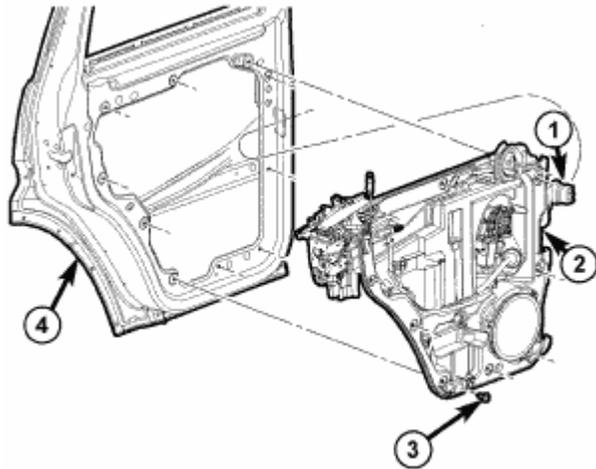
Removing/Installing Door Plug & Rear Exterior Handle Nut
